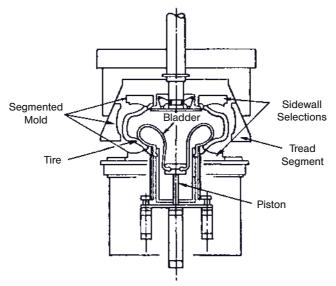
Tire curing press containing a segmented mold(J.G. Sommer, Elastomer Molding Technology, Elastech (2003) Ch. 1)
